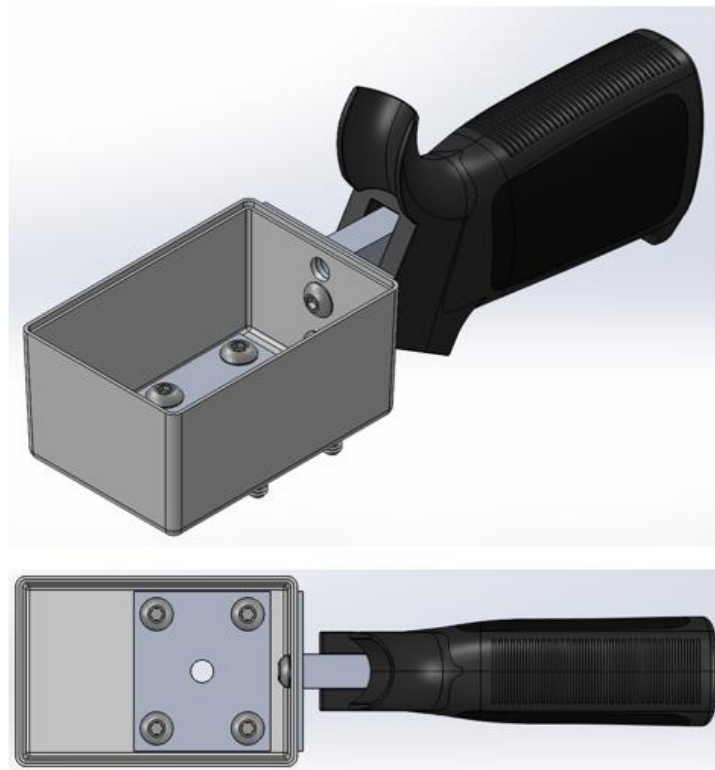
SolidWorks Subassembly of Pivot Block and Beam
